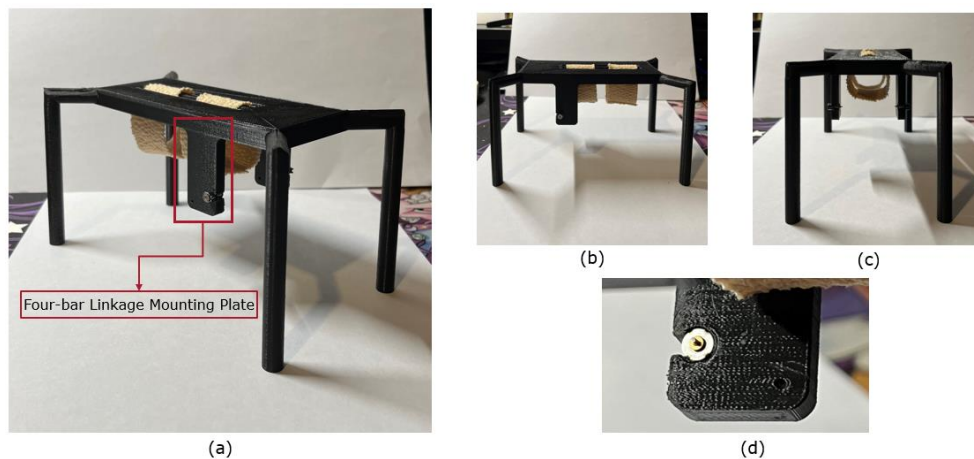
3D printed support table. (a) Isometric view; (b) Front view; (c) Side view; (d) Detailed view of the connection between the motor and the four-bar linkage mounting plate
